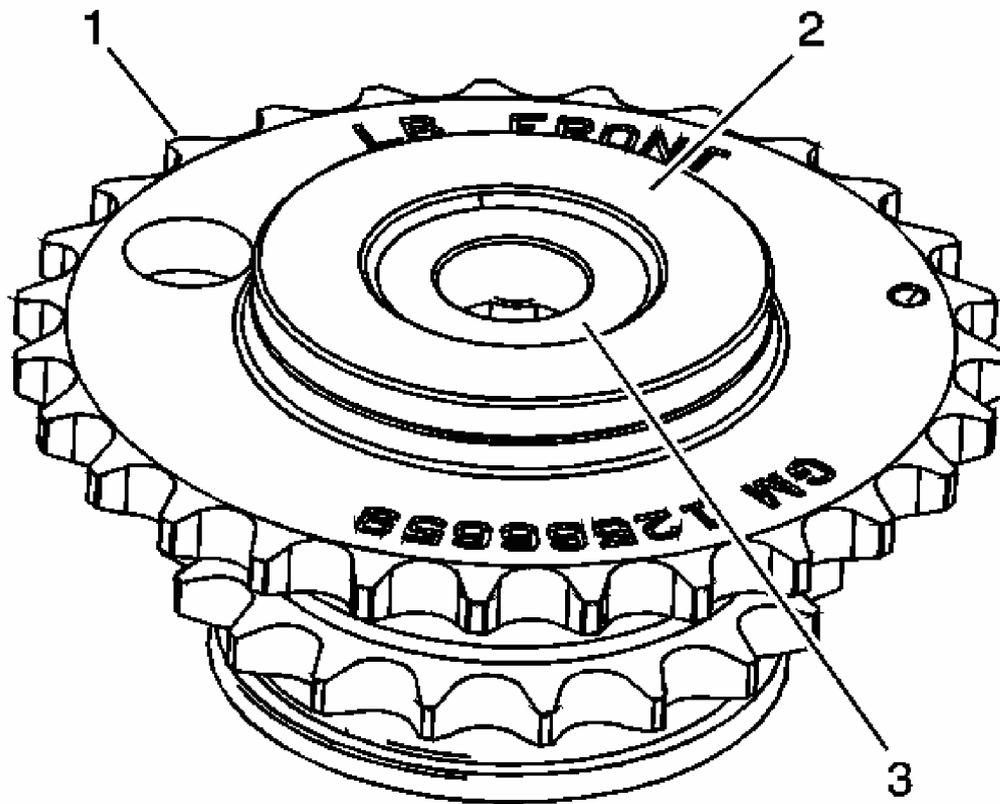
Inspecting Front Of Left Intermediate Sprocket
